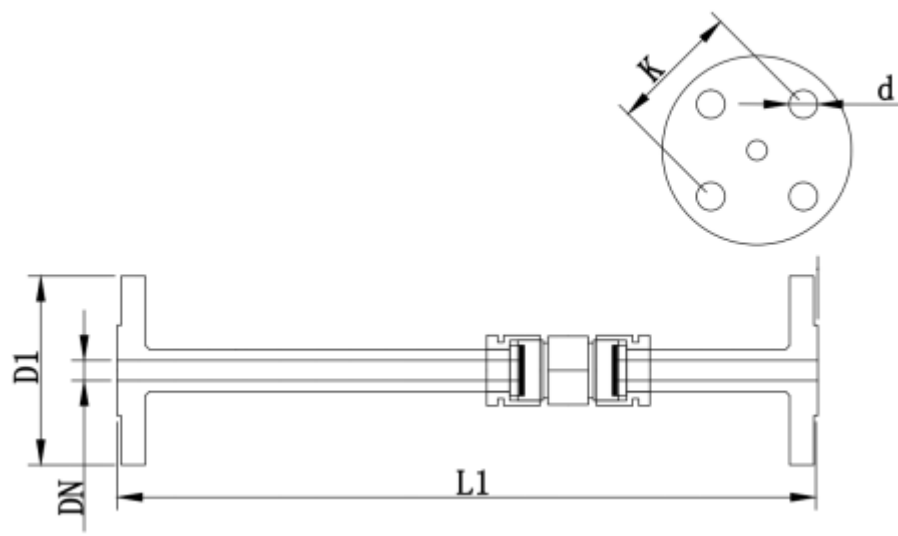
Dimensional drawing of flange connection type turbine flow sensor DN4~DN10
